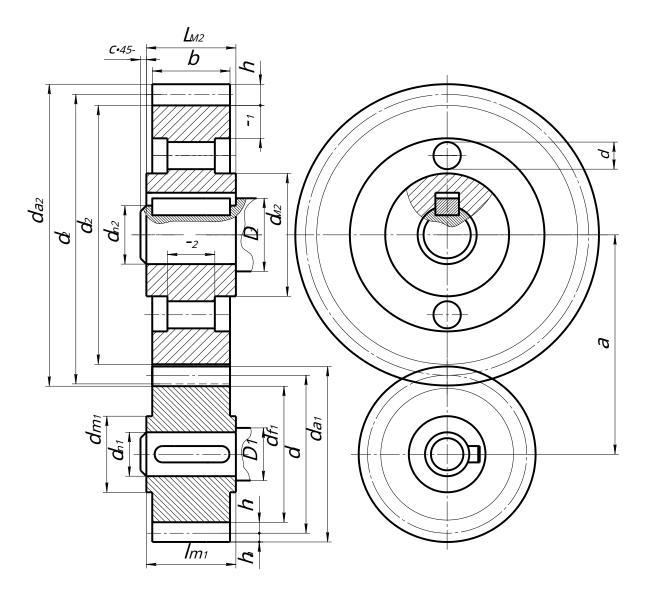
General drawing for calculating geometric parameters of cylindrical gear transmission
